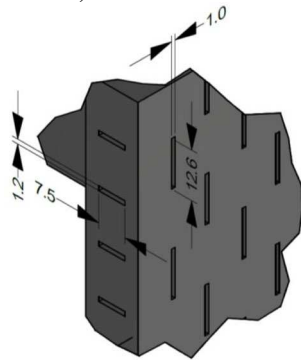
Vertical and horizontal notch details (dimensions are in mm).
